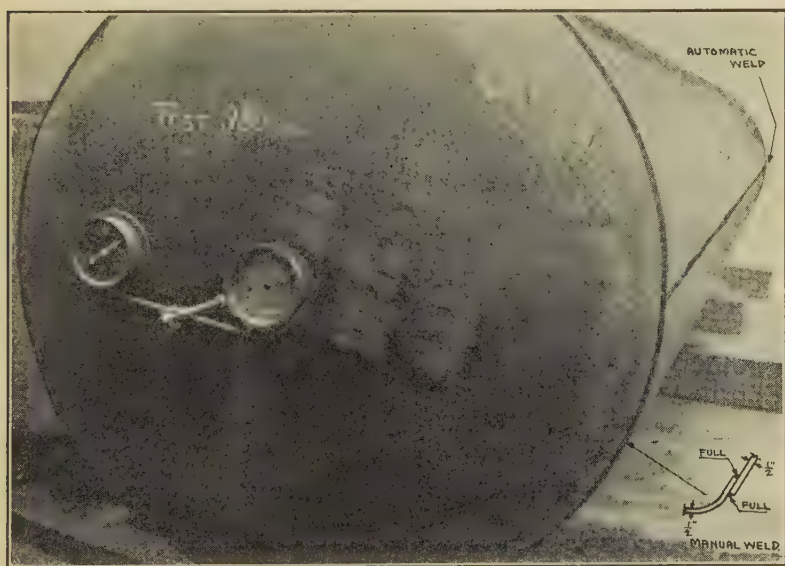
Manually and automatically metal-arc-welded tank tested by hydraulic pressure to 350 lb. and joints hammered with 10-lb. sledge.
